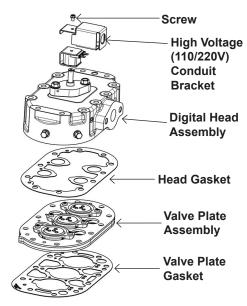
Exploded View of Copeland Discus Digital head and valve plate assembly
